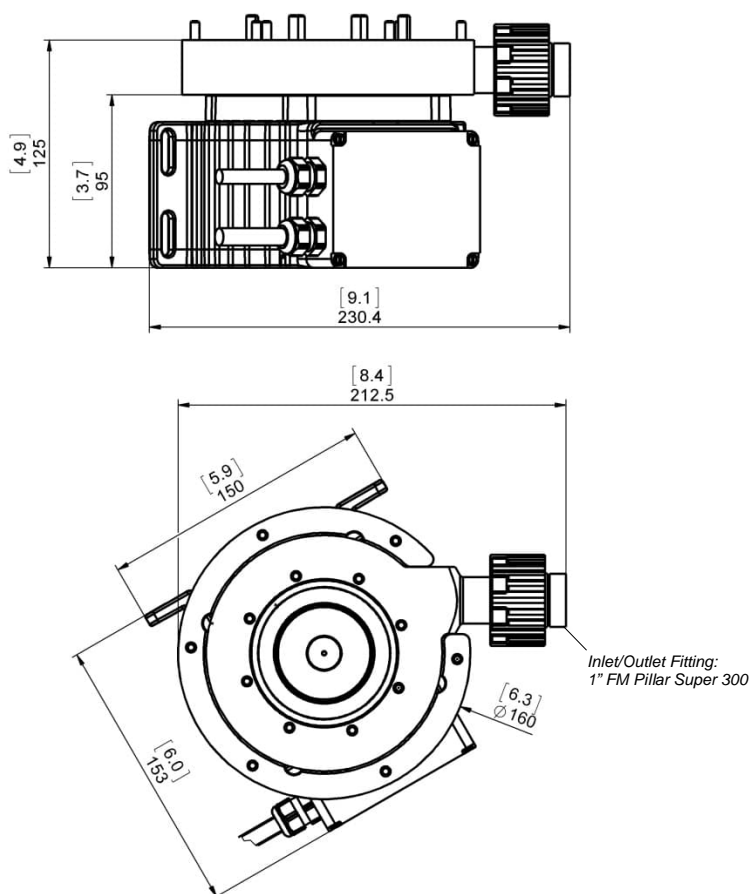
Basic dimensions of motor LPM-600 with pump mixer head CPM-600.1
